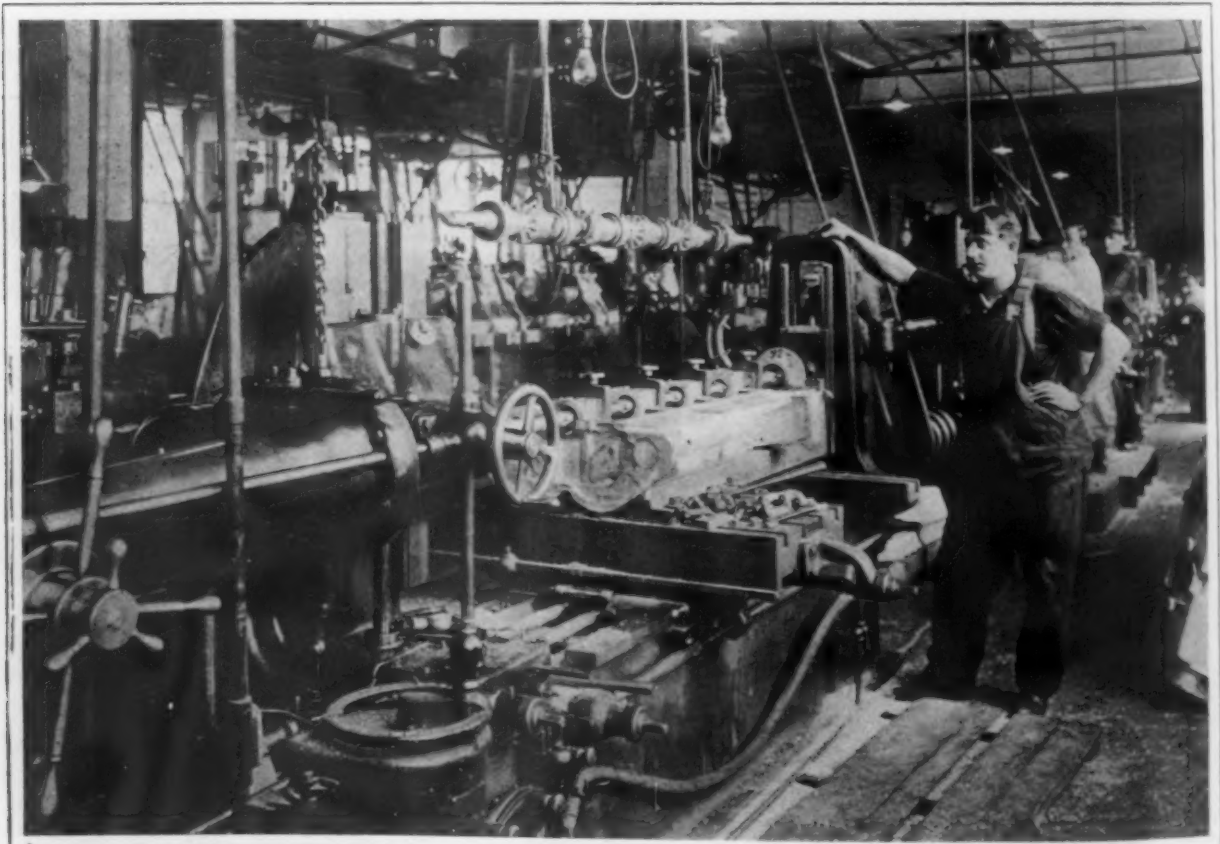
Finishing the Crank Case Bearings on a Horizontal Boring Machine. The Second Cutter Bar Is Conveniently Suspended Over the Machine and Ready for Use
